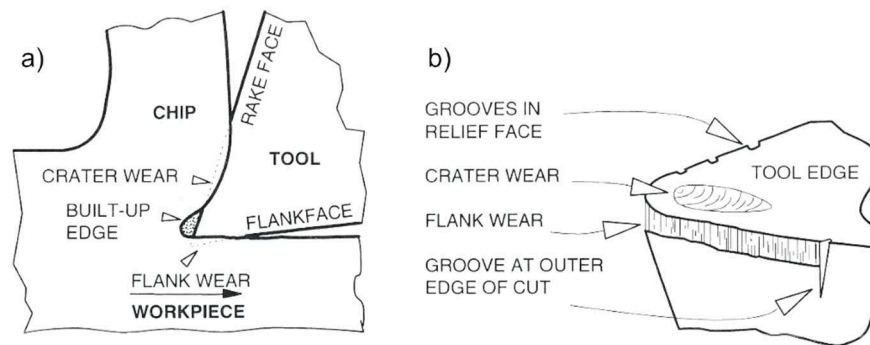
a) Formation of wear forms on a cutting insert during machining, b) typical wear form on the different surfaces of a cutting insert [13].
